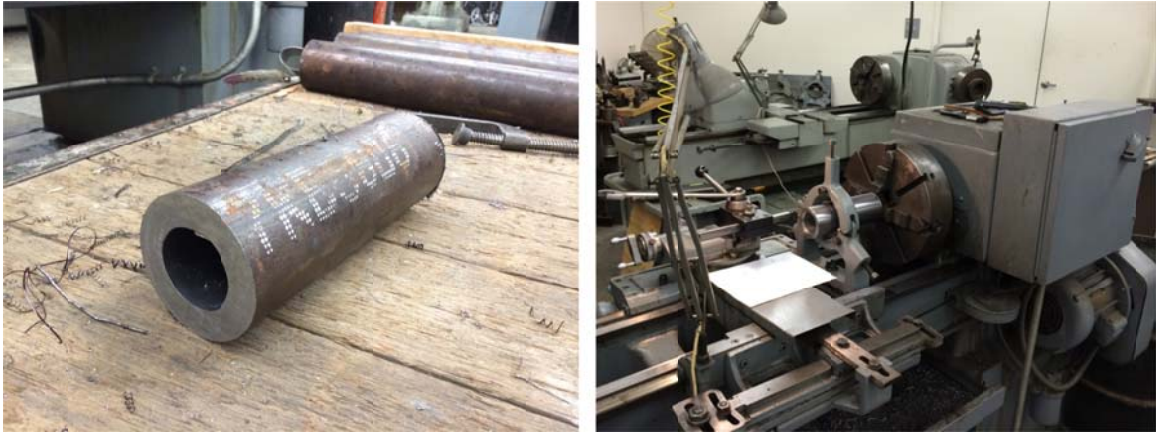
Fabrication of the struts from raw 4140 steel cylinders using the milling machine at the machine shop at University of California, Berkeley
